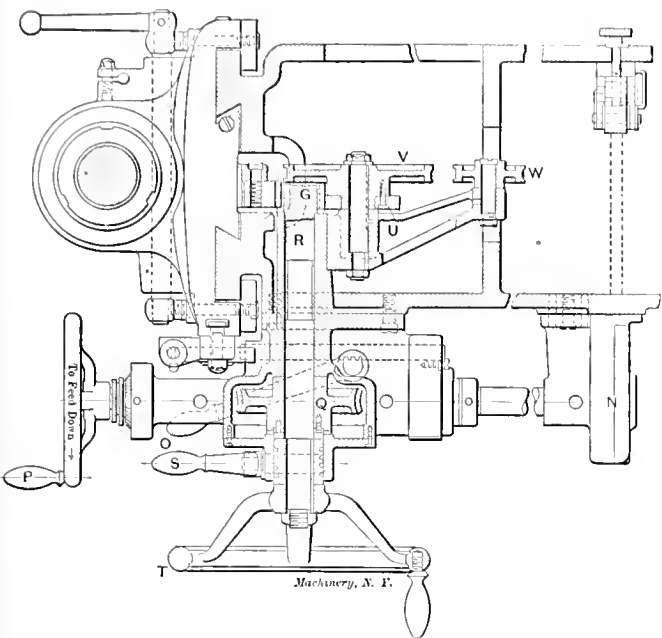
Arrangement of Hand and Power Feeds for the Spindle.
